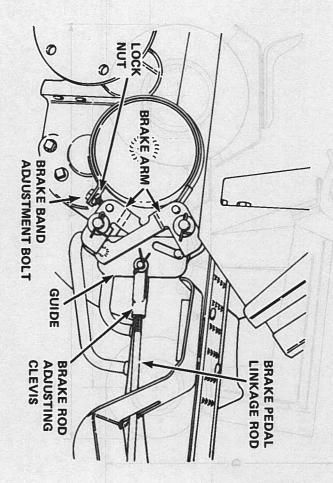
(Tire and Wheel Removed for a Clear View)
